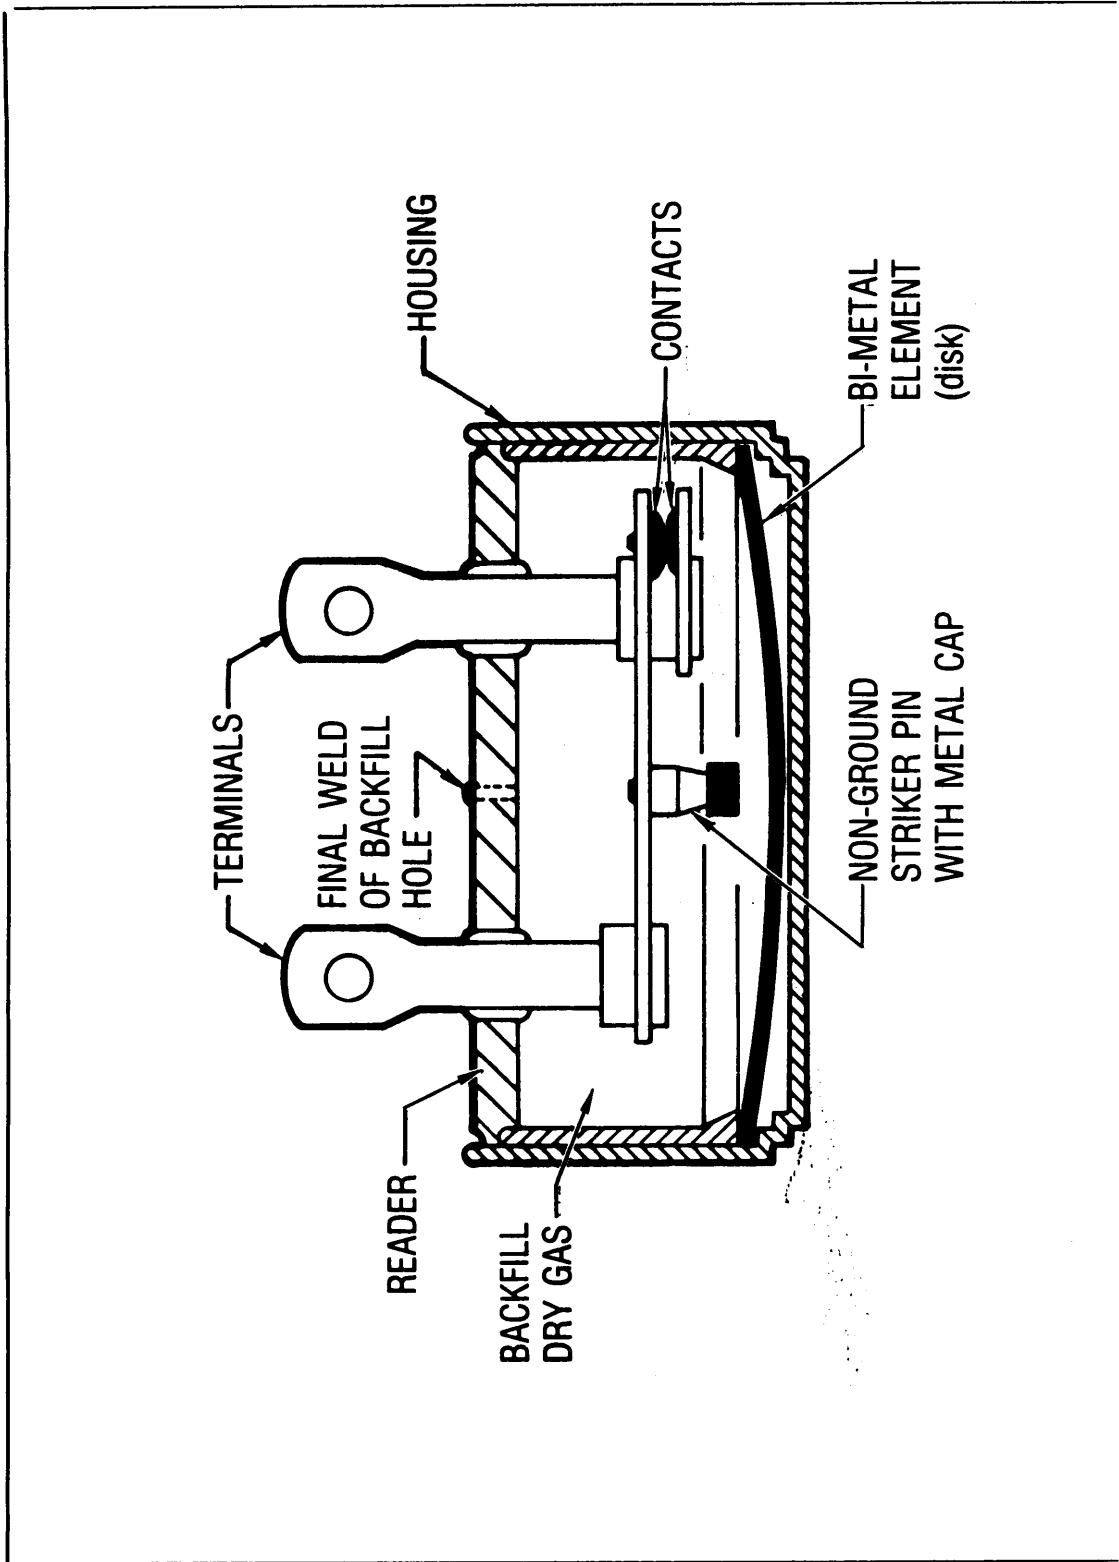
Type B Thermal Switch Cross-sectional View.
